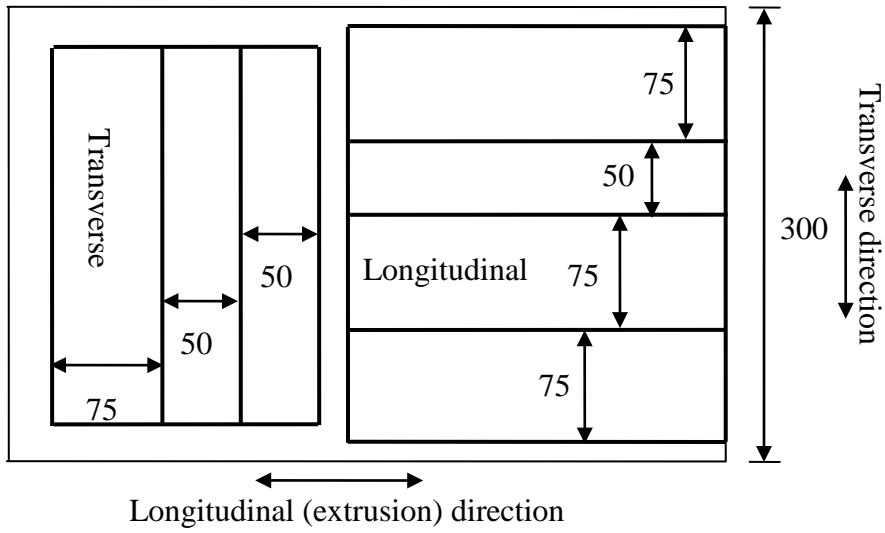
Illustration for where door plate samples were cut from extruded door panel (all dimensions in mm)
